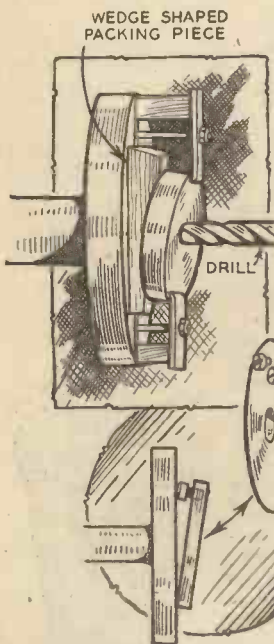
For drilling holes at an angle it may be necessary to pack the work as shown here.
